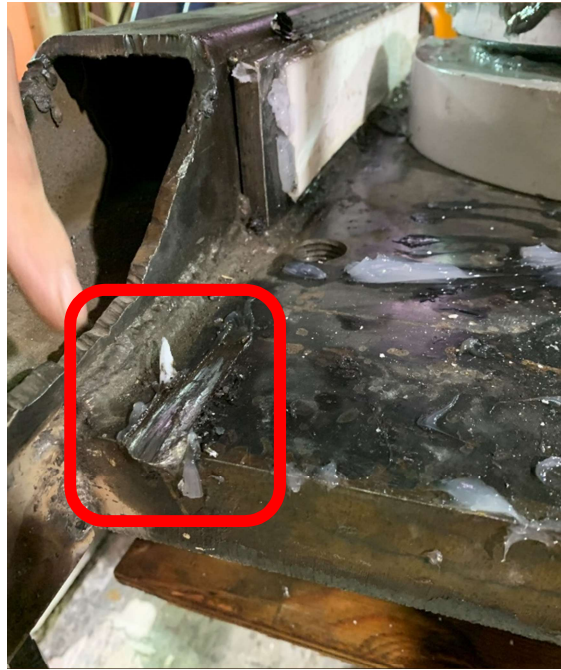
Spreader Plate Gouge Caused by Assembly Binding
